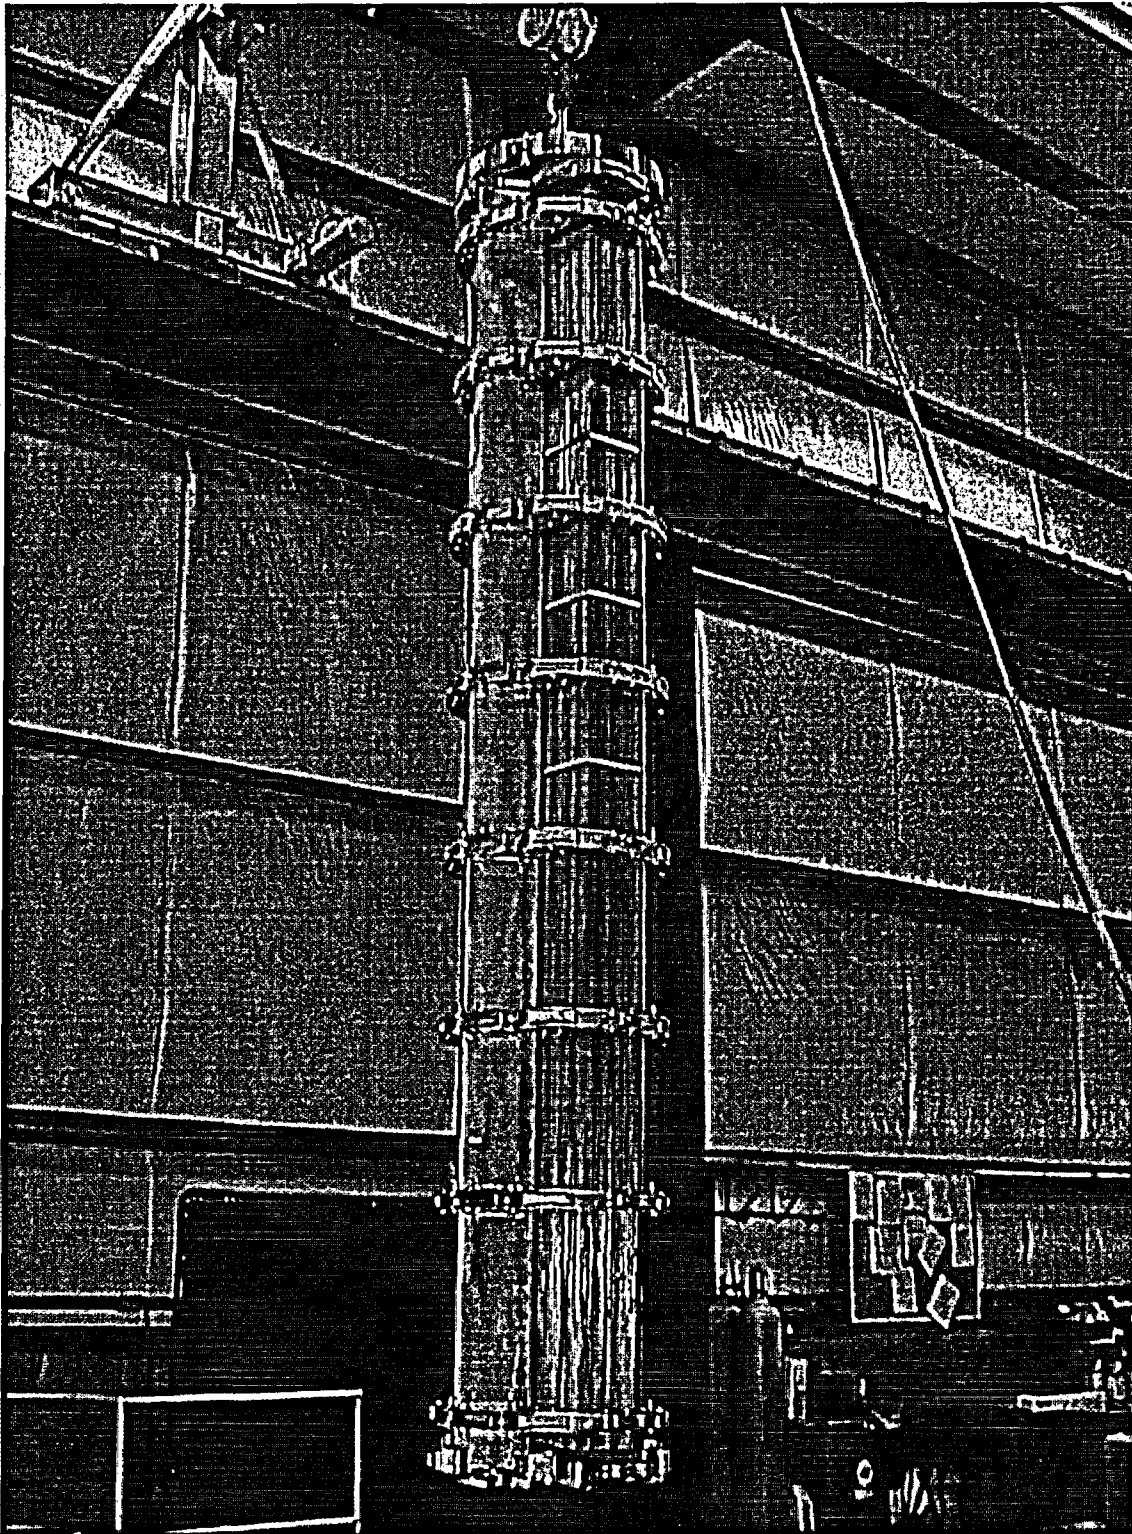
Dummy Fuel Assembly (Loaded into Strongback)
